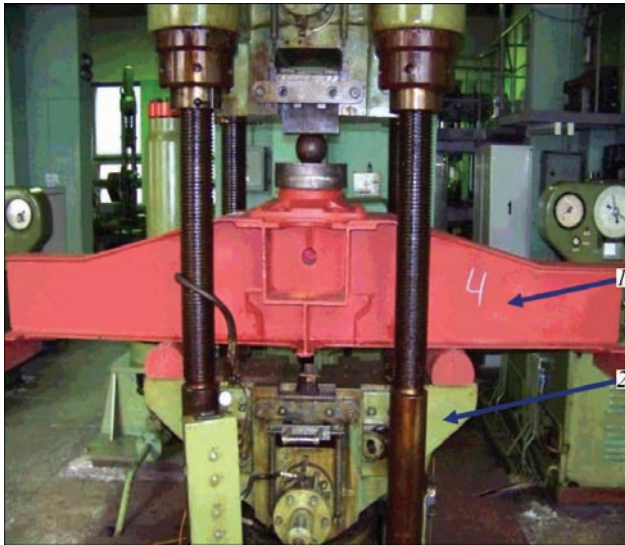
Sample of bolter assembly No.4 (1) in testing machine ZDM-200pu (2)
